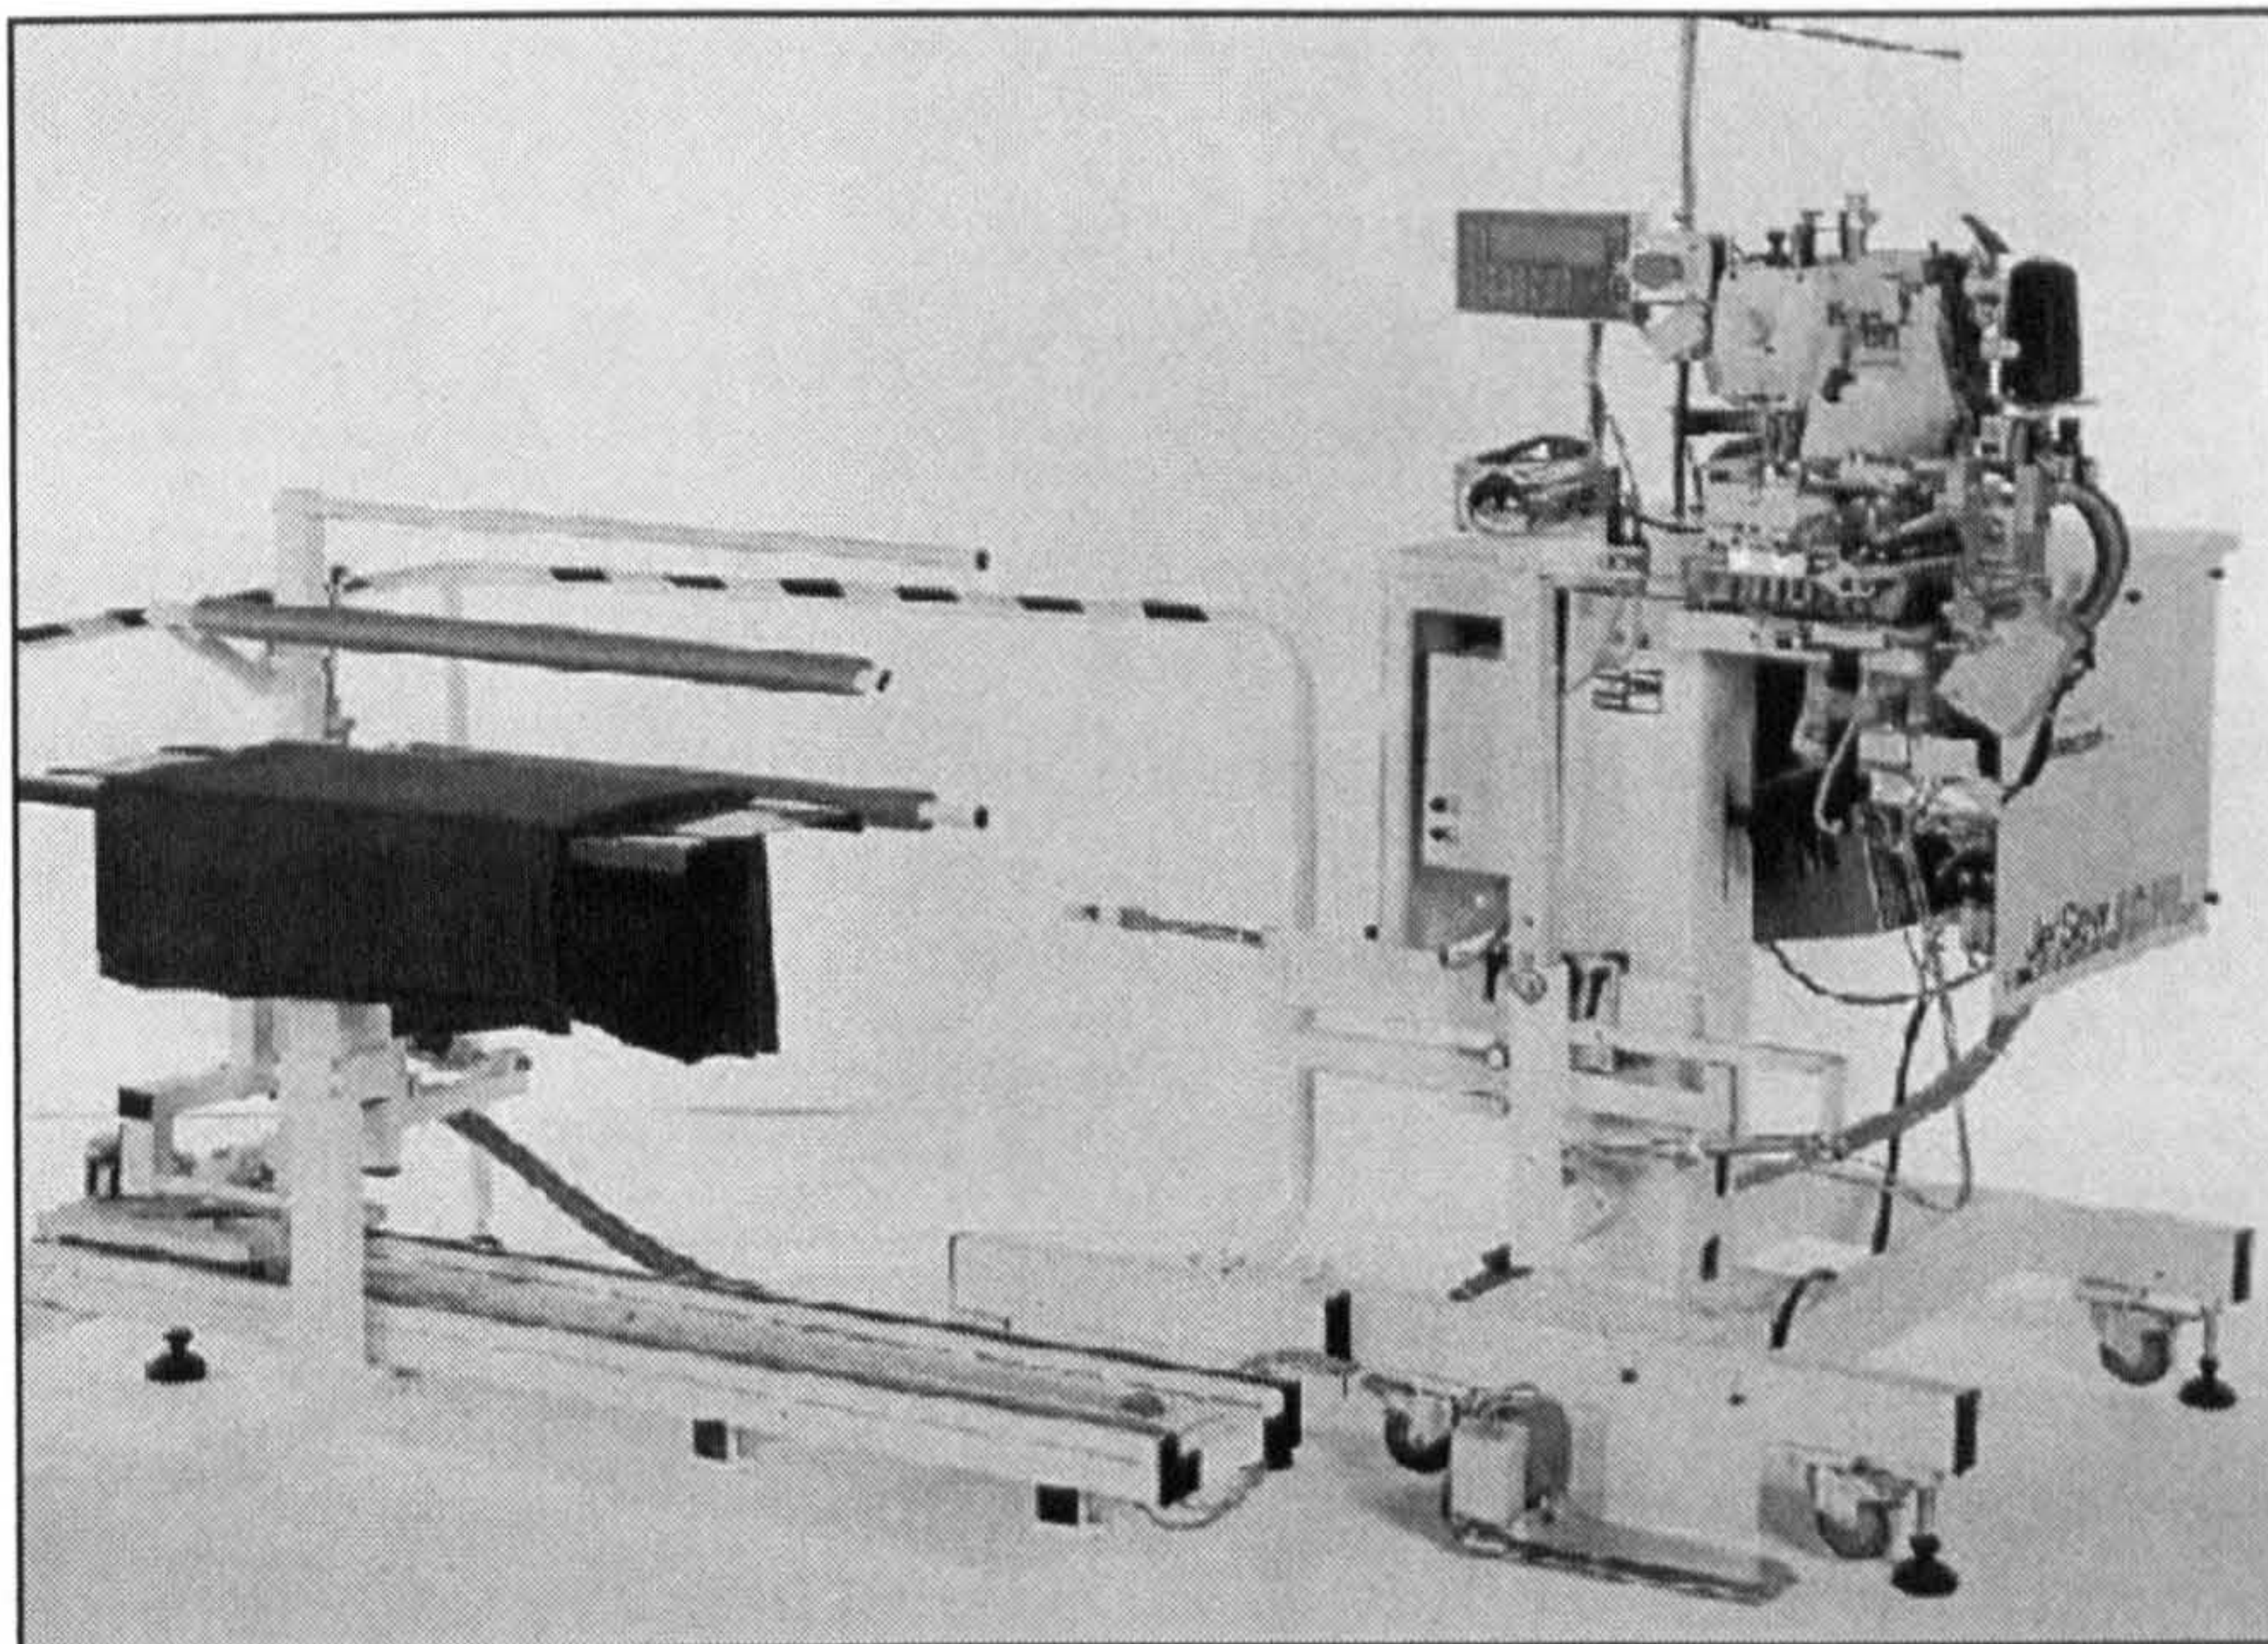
An automated load/ unload machine for the Jet Sew Bottom hemming sewing machine.
